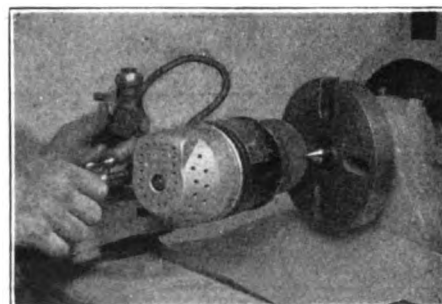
Electric Grinder is Held in Tool Post and Adjusted to Position.
